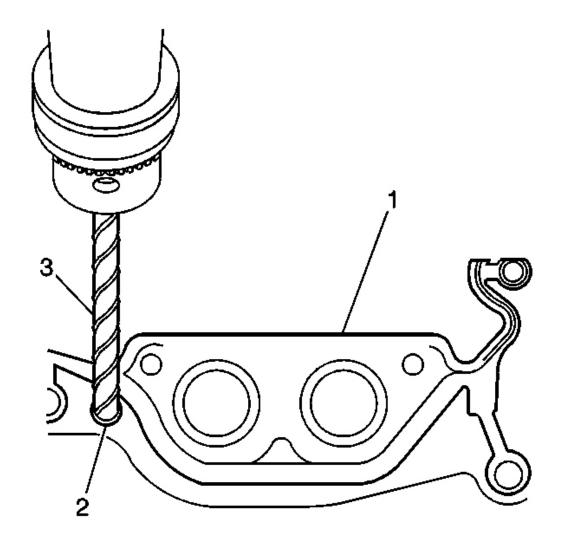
Drilling Oil Pan Gasket Retaining Rivets Courtesy of GENERAL MOTORS CORP.
